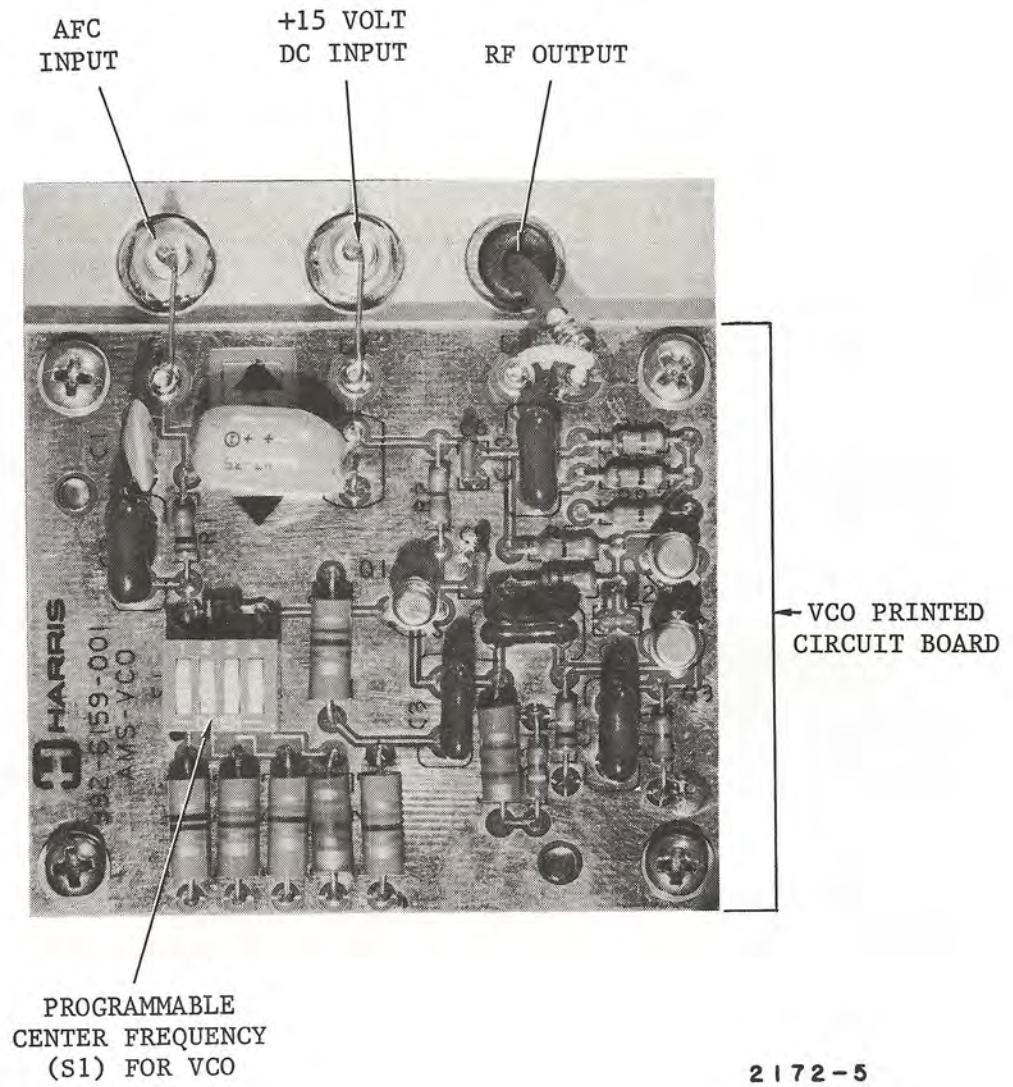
STM-1 VCO Board With Cover Removed, Controls and Indicators
